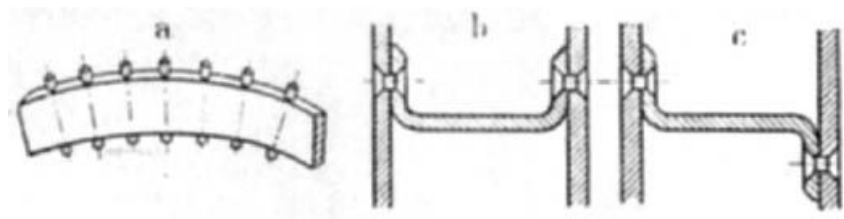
(a) Blade with fixed rivets. (b) and (c) typical riveting layout.
